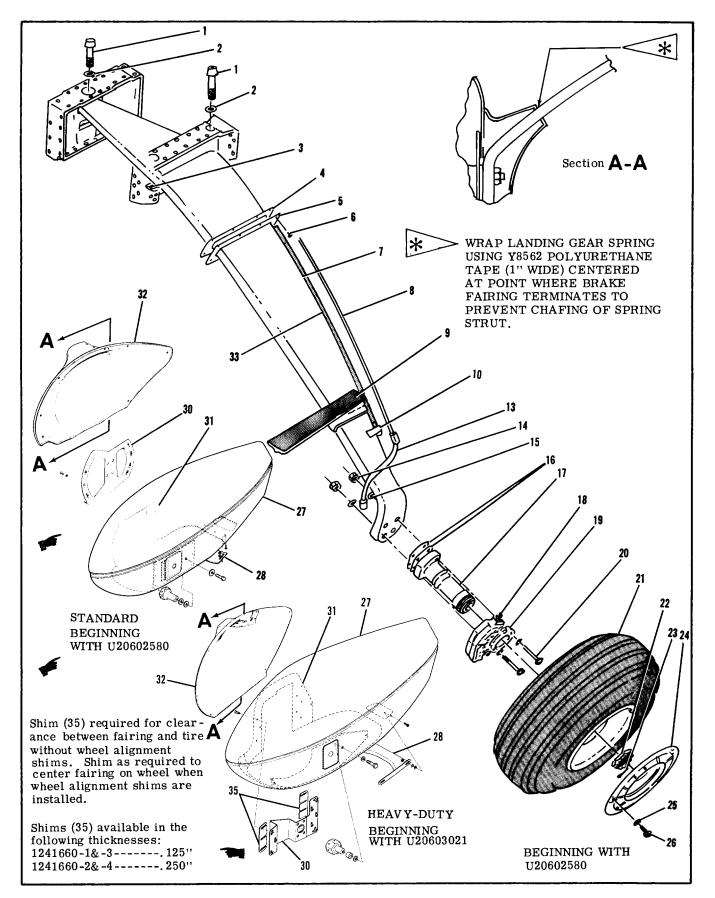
Main Landing Gear (Sheet 2 of 2)
